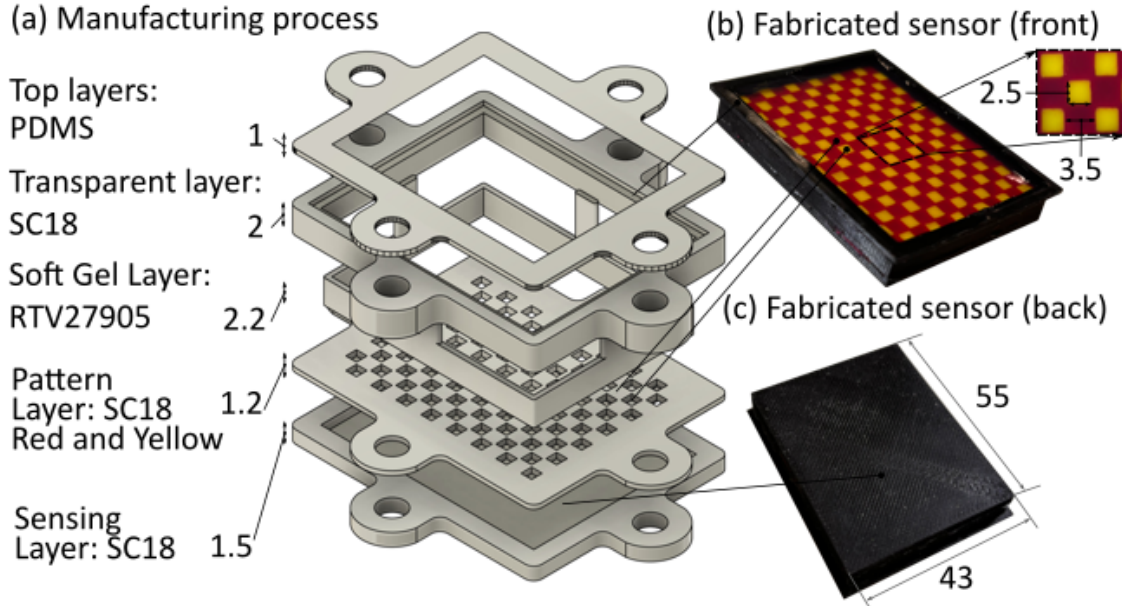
The silicone molding-based fabrication of NUSense. (a) Manufacturing process with all molding layers, (b) front and (c) back of the fabricated elastomer. All measurements are in millimeters. SC18 is Sorta-Clear 18.
